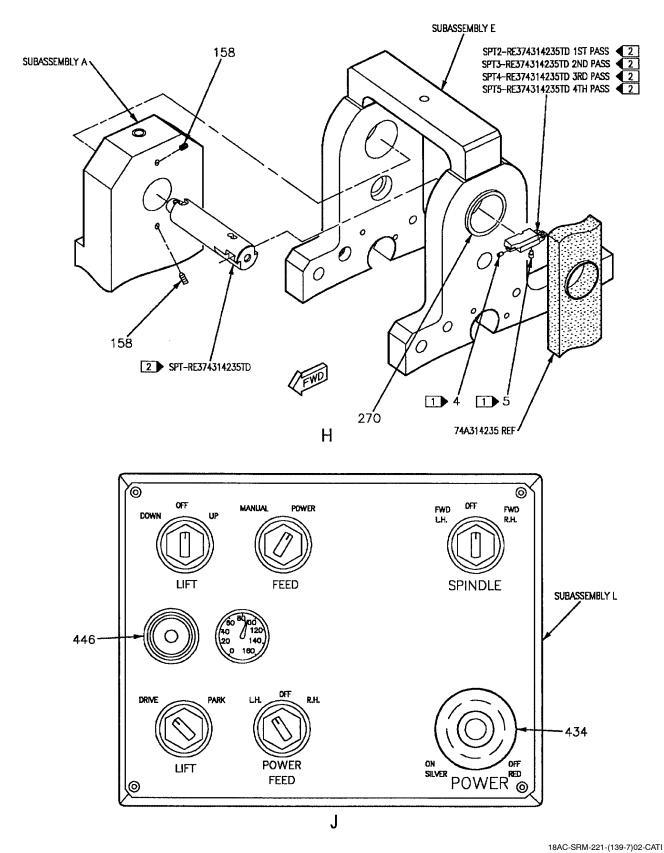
Drag Brace Support Fitting Reaming (Sheet 7)
